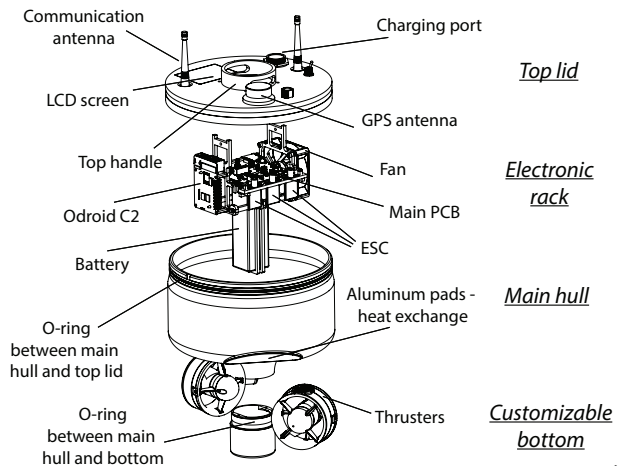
Exploded view of the upgraded buoy design v2 displaying its modular design and main components.
